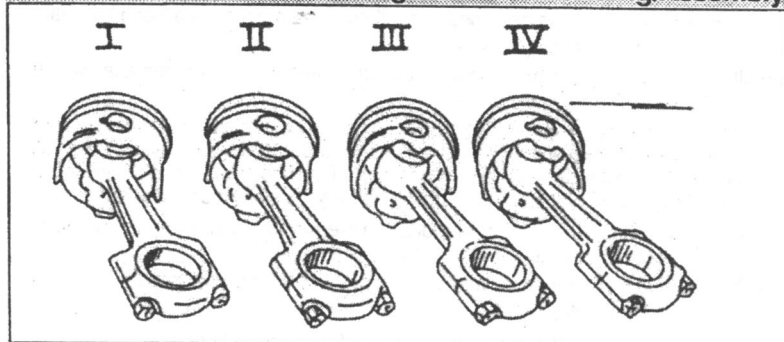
Provisionally attach the big end bearing caps and bearing shells to connecting rods and pistons and lay them out in the manner shown.
